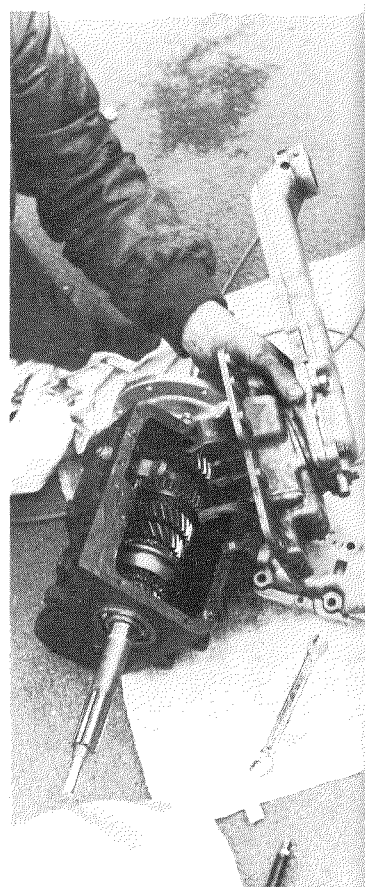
The gear selection on my standard box had been sloppy for some while, so the selectors were removed.
